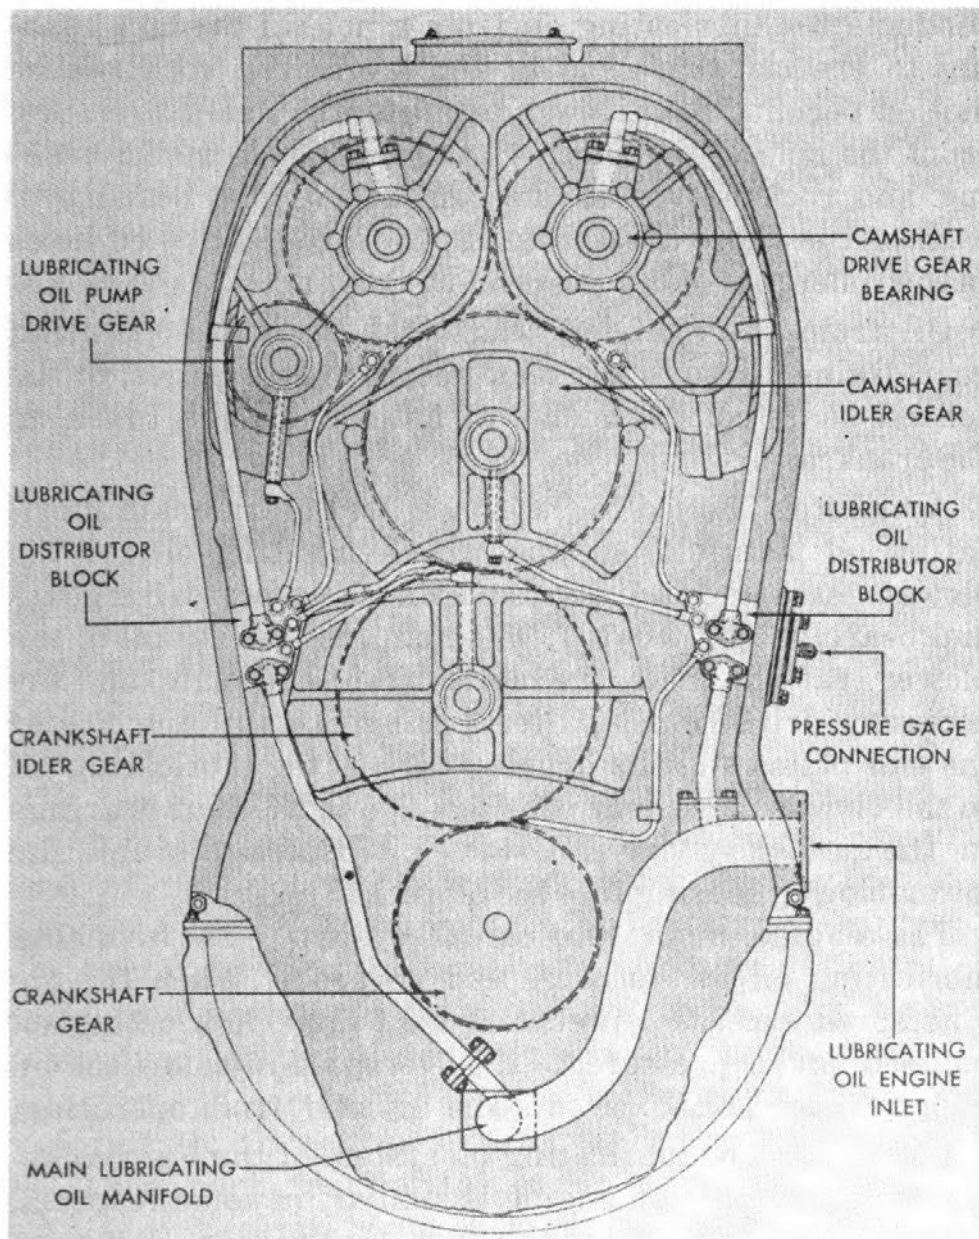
Camshaft drive lubricating-oil lines (GM 278A).
